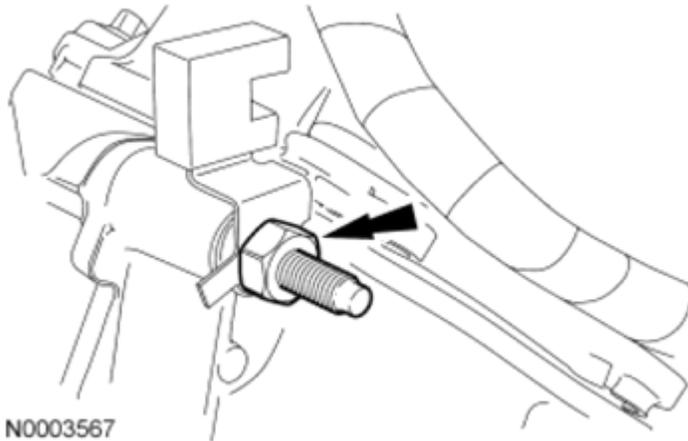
Locating LH Radio Ignition Interference Capacitor And Nut
